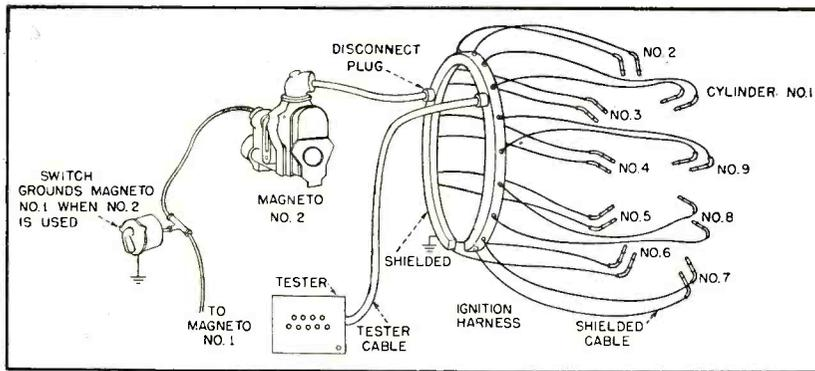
Simplified detail of conventional ignition harness and method of attaching tester
